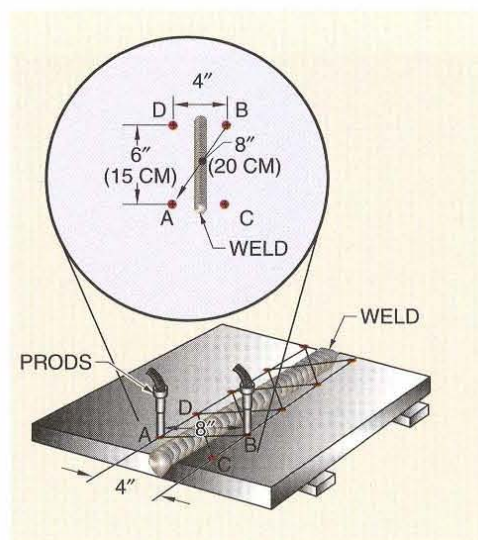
For efficient coverage of welds when using the prod method, prods must be crisscrossed and spaced appropriately.
